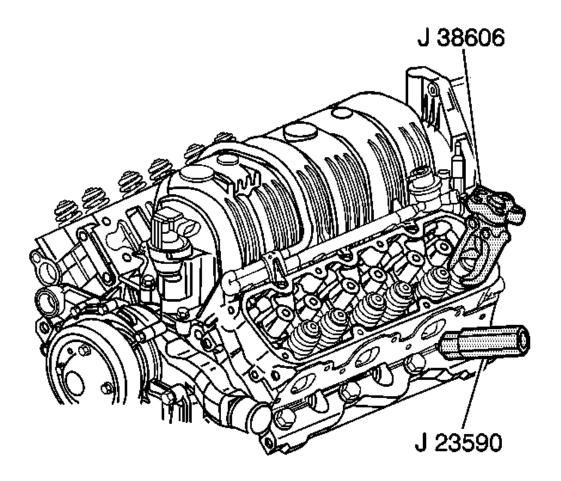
J 38606 Installed On Valve Spring Courtesy of GENERAL MOTORS CORP.
